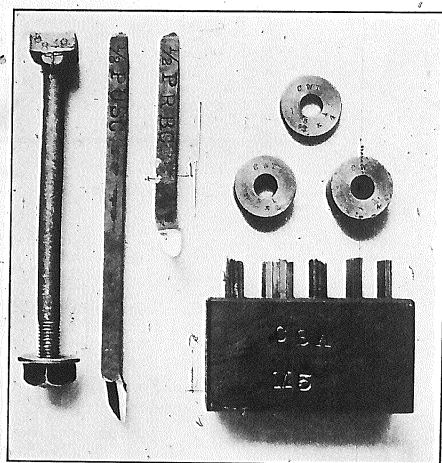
Standard Tools. Clamping bolt, side tool, round-nose roughing tool, washers for belt, set of "shims," or packing pieces, and small wedges.
